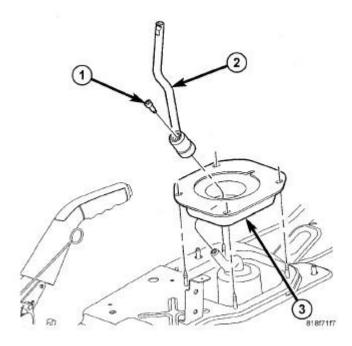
Shift Knob & Shift Boot Courtesy of CHRYSLER LLC
